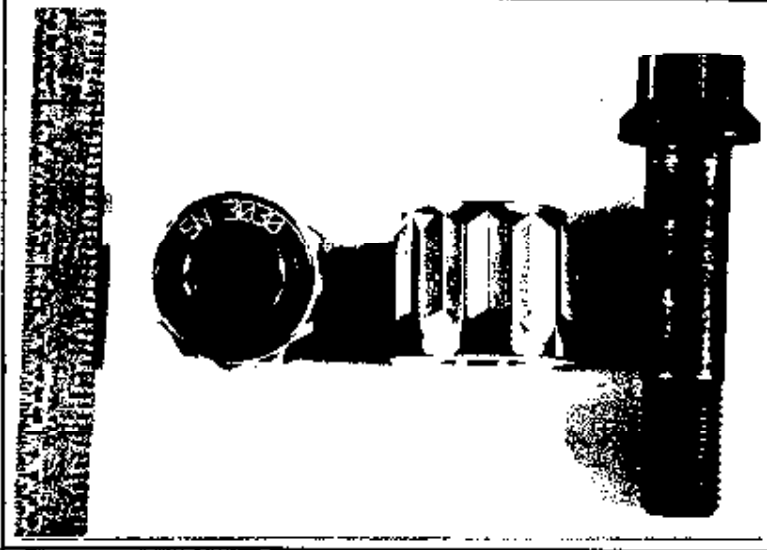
(left).- Illustration of Rapid Assembly Nut (ZipNut) submitted by Thread Technology, Inc. Sterling, VA. Nut conformed to McDonnell Douglas dwg. 1F44595, and identified as TTI P/N 050006. Test bolt is Boeing P/N BAC B30LE A236 CRES, with dry film lube finish, specified for this test program. Test samples identified as Lot #3.
